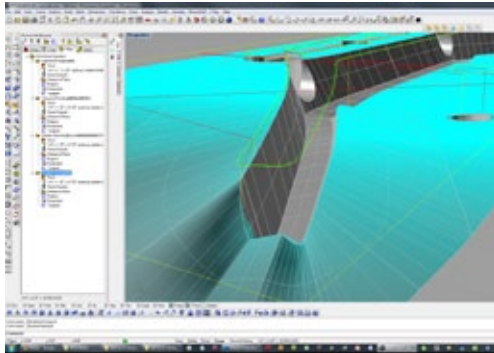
rhinocam toolpaths for milling sand billet.jpg
